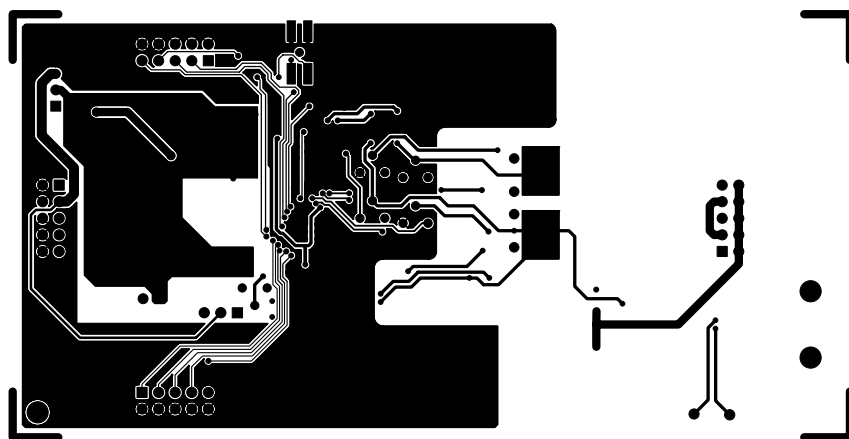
Si321xM-DCQ-EVB with Discretes Solder Side
